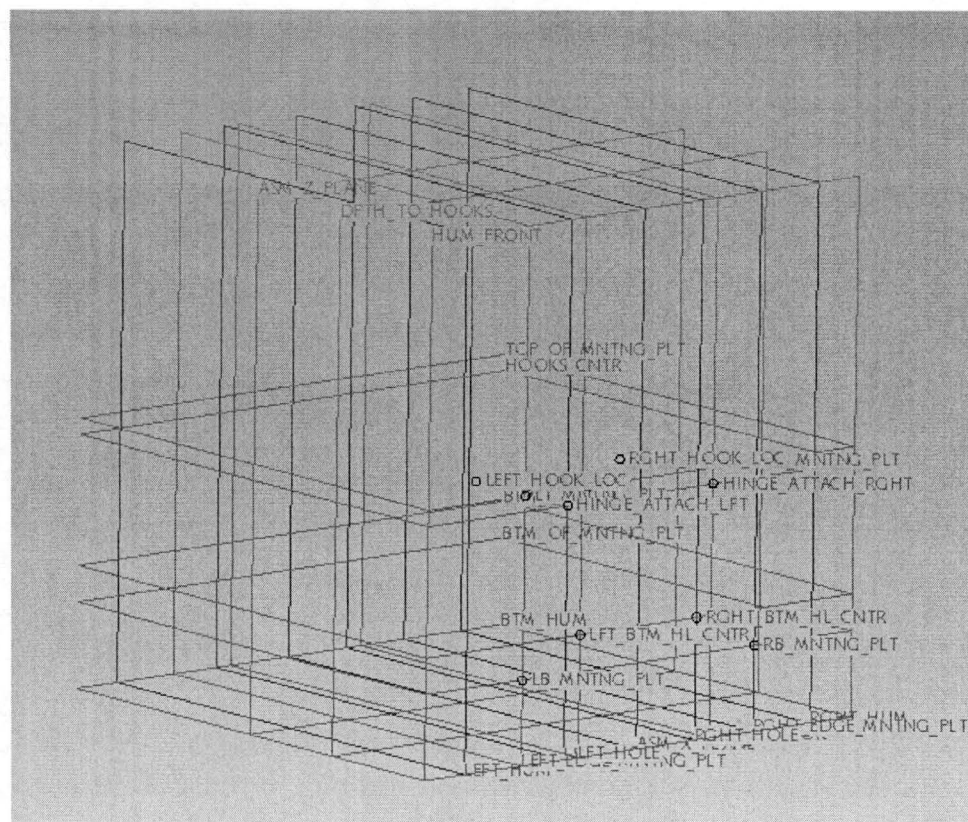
Skeleton for Hummer Mounting Plate Assembly
